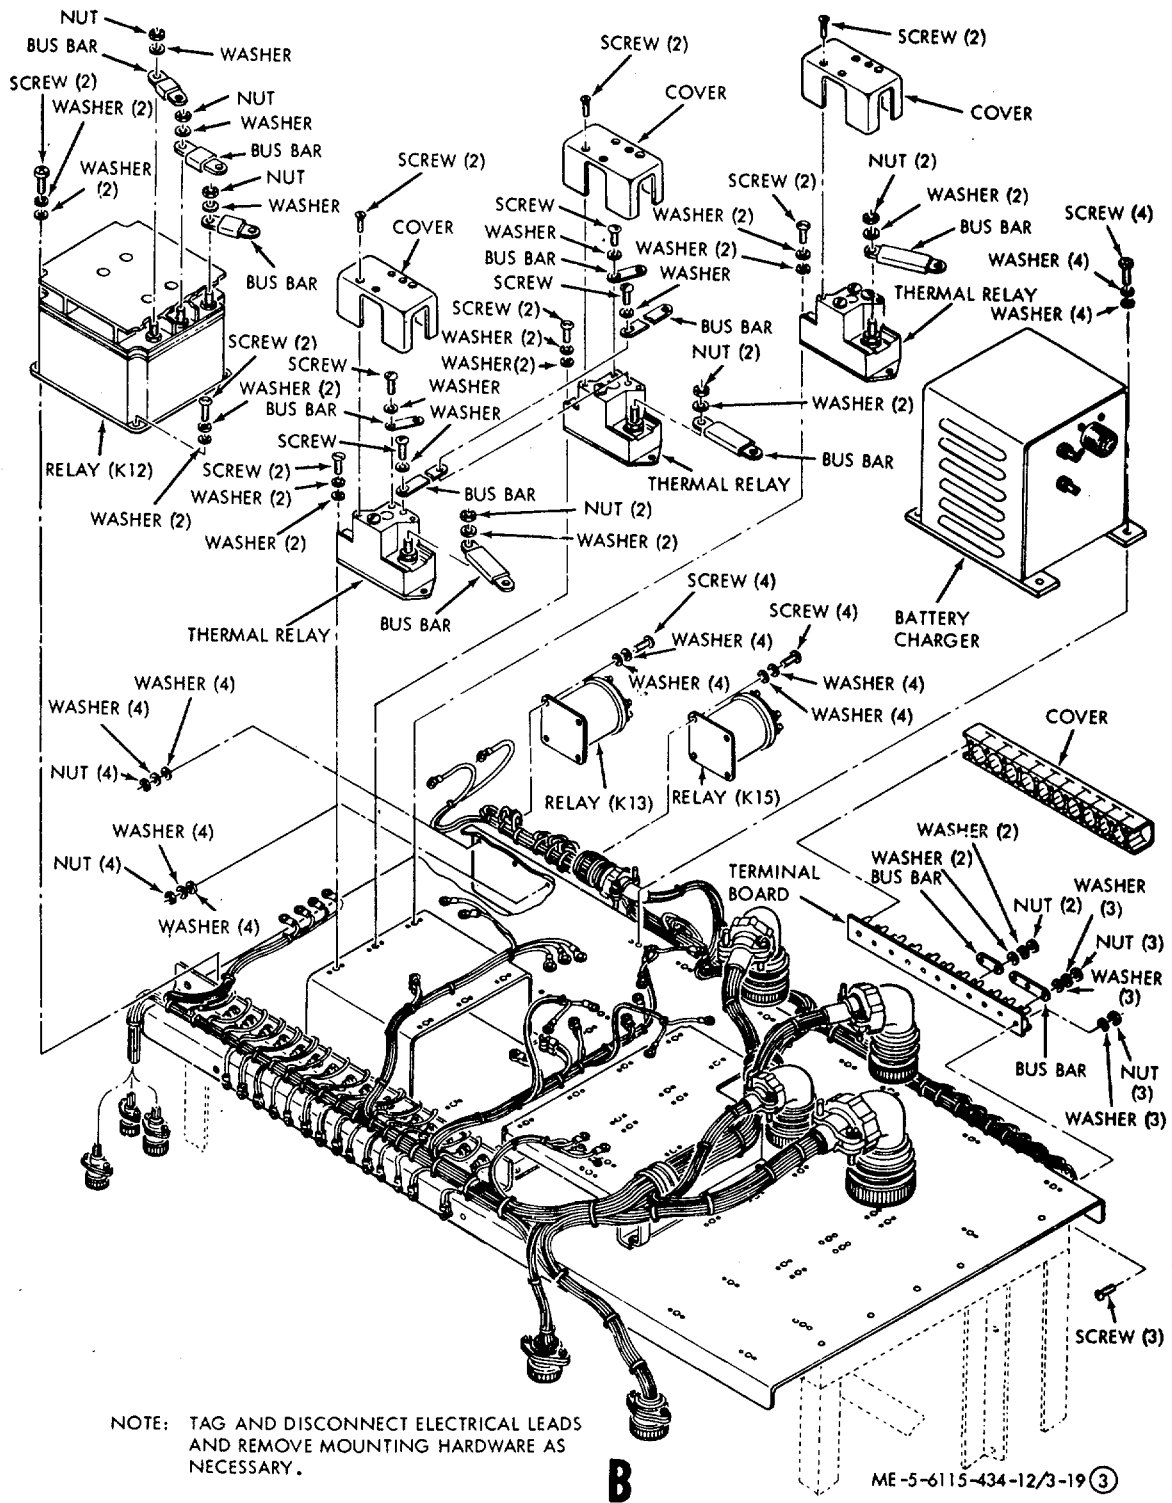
Upper rack assembly component replacement (Sheet 3 of 3).
